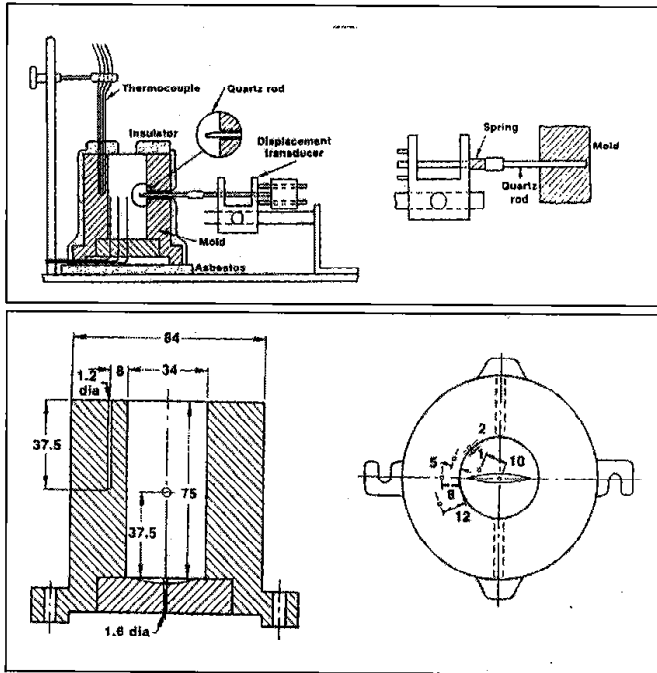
Cylindrical aluminium solidification test. Thermocouple locations in the mould and casting.
